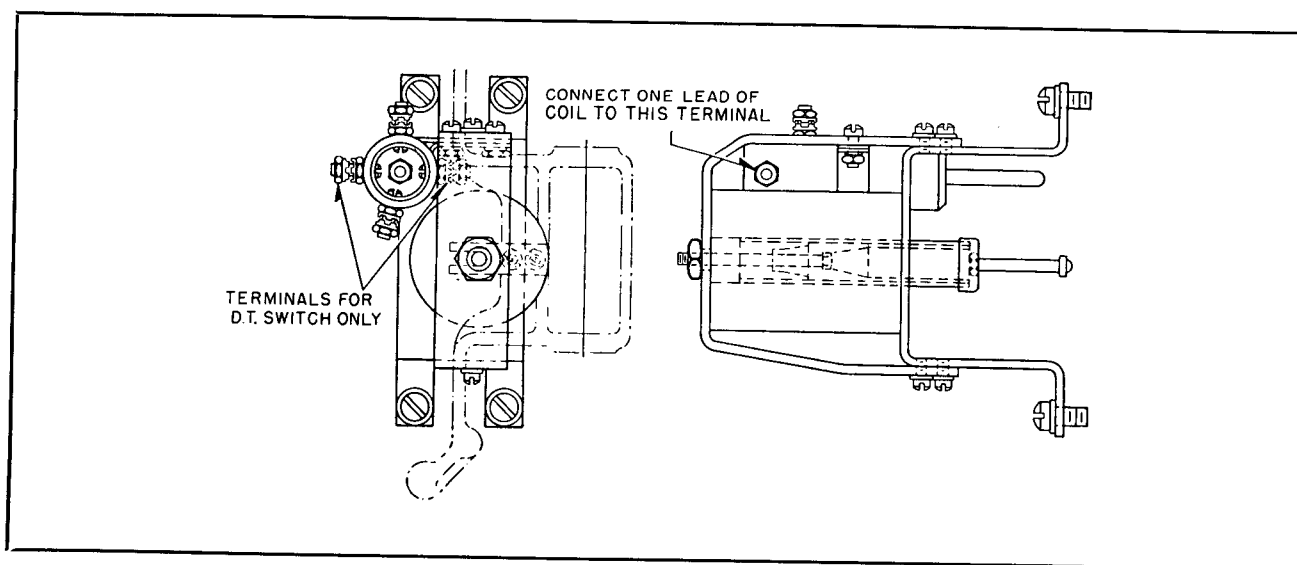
Shunt Trip and Auxiliary Switch Assembly
